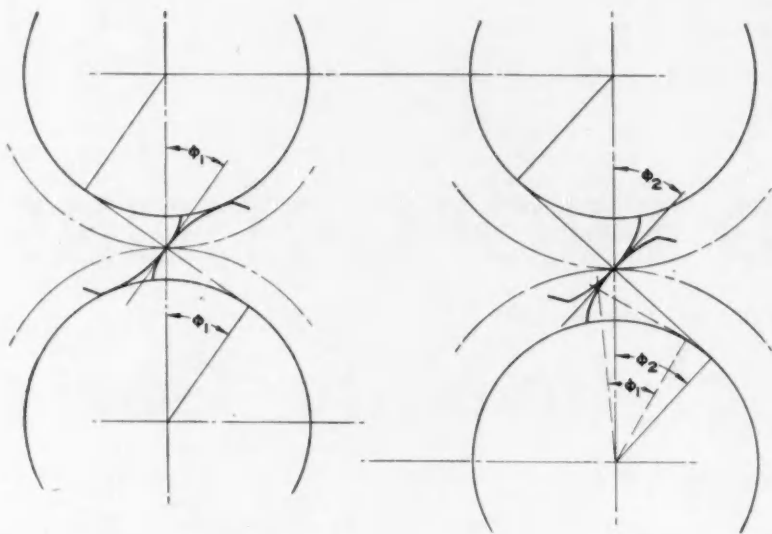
Sketch showing elements determining pressure angle of an involute gear
